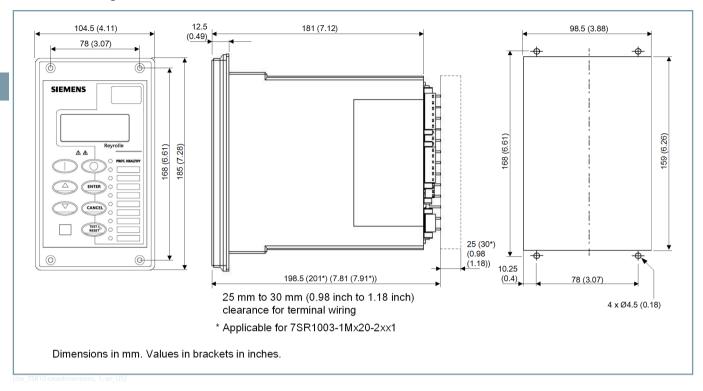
/20 Front View, Side View and Panel Cut –out View
